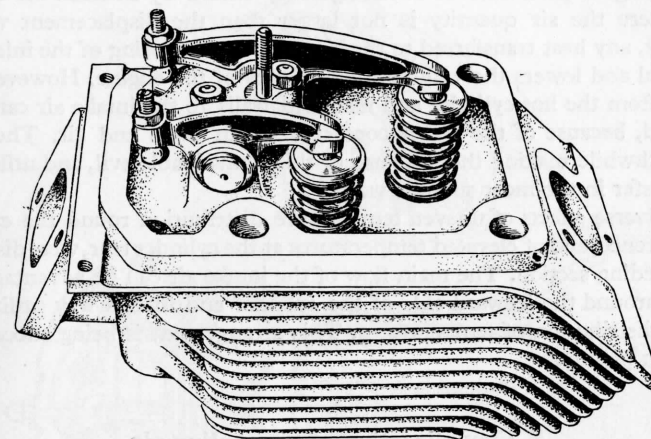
Cylinder head of a compression-ignition engine. Air is directed by the curved fins to give better cooling in the region of the exhaust valve.
